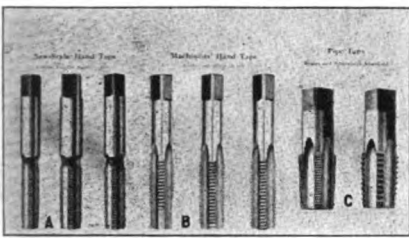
SHOWING THE DIFFERENT TYPES OF THREADING TAPS
